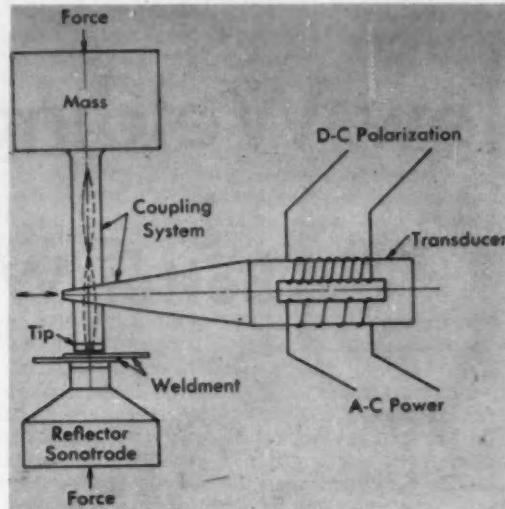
Essential mechanism for ultrasonic welding.
